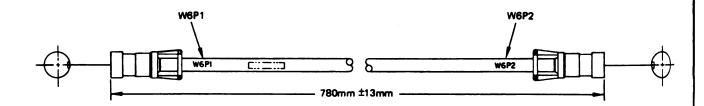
W1 Cable Assembly Wiring Diagram (Sheet 2 of 2)
